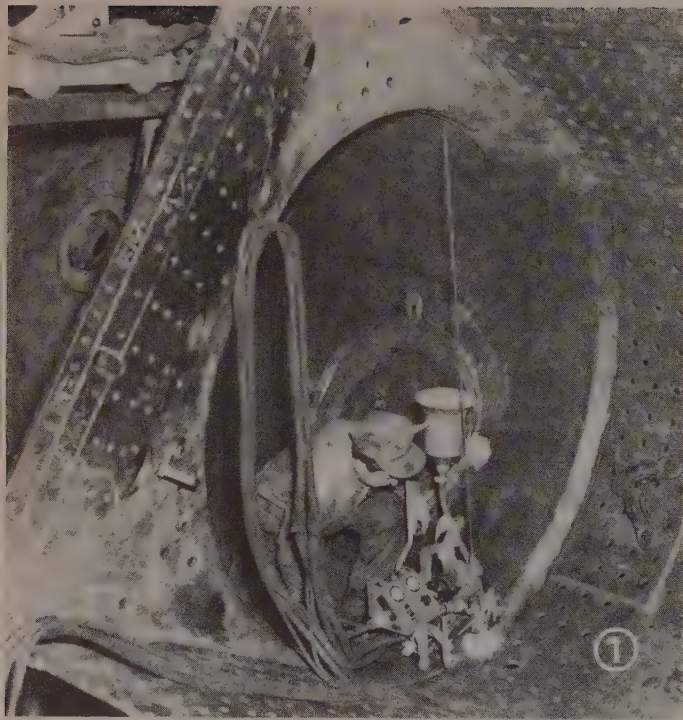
Welding third course wrapper sheet and throat sheet
